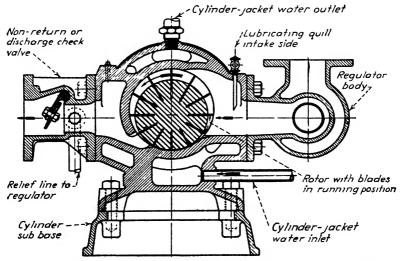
Cross section showing water passages and lubricating quill. (Courtesy of Fuller Co.)
